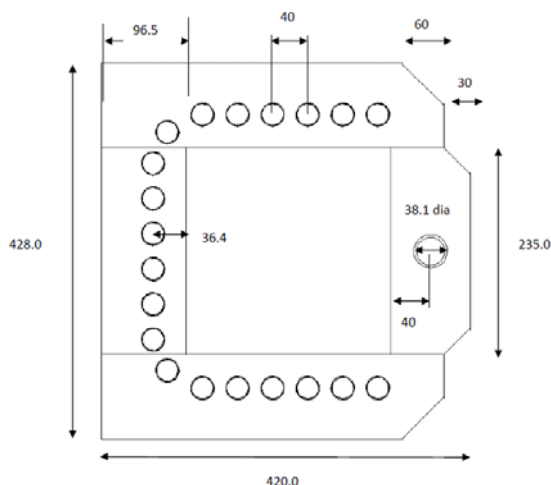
Schematic of the LANL PWR Collar moderator assembly. All dimensions are in mm.
